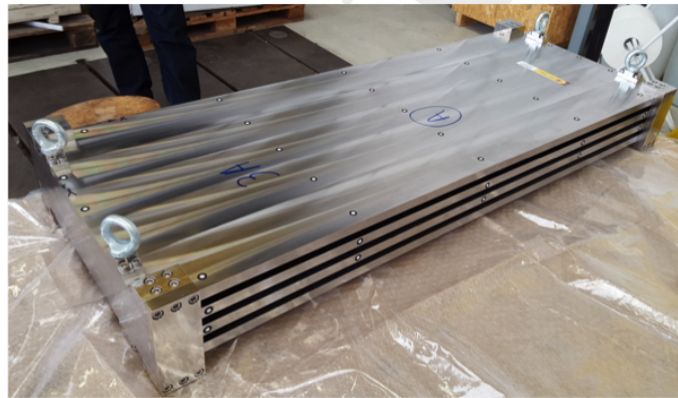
A prototype of an SDHCAL mechanical structure assembled using the electron beam welding technique.
